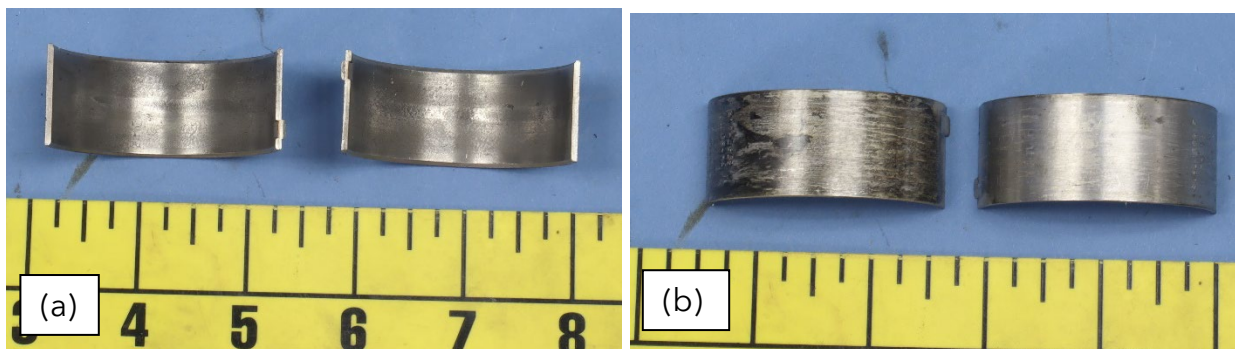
Views of the (a) interior and (b) exterior surfaces of the conrod bearings.
